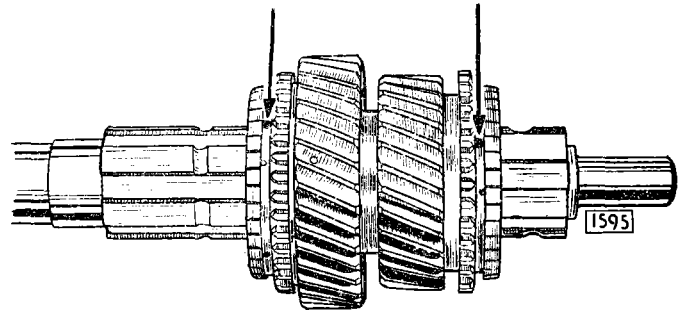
Showing the holes through which the thrust washer locking plungers are depressed.
